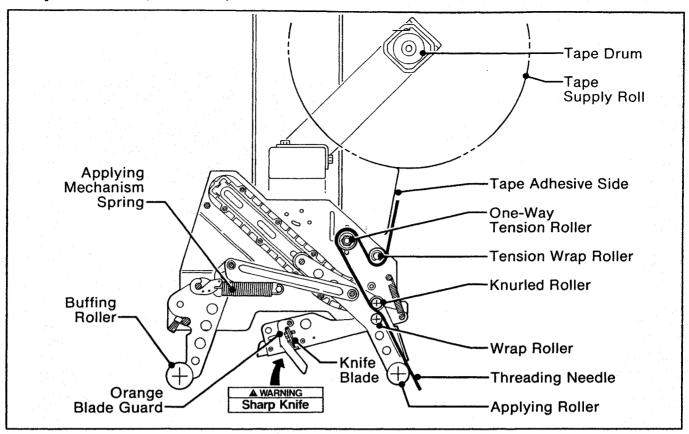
Tape Threading Diagram - Upper Taping Head - Left Side View
